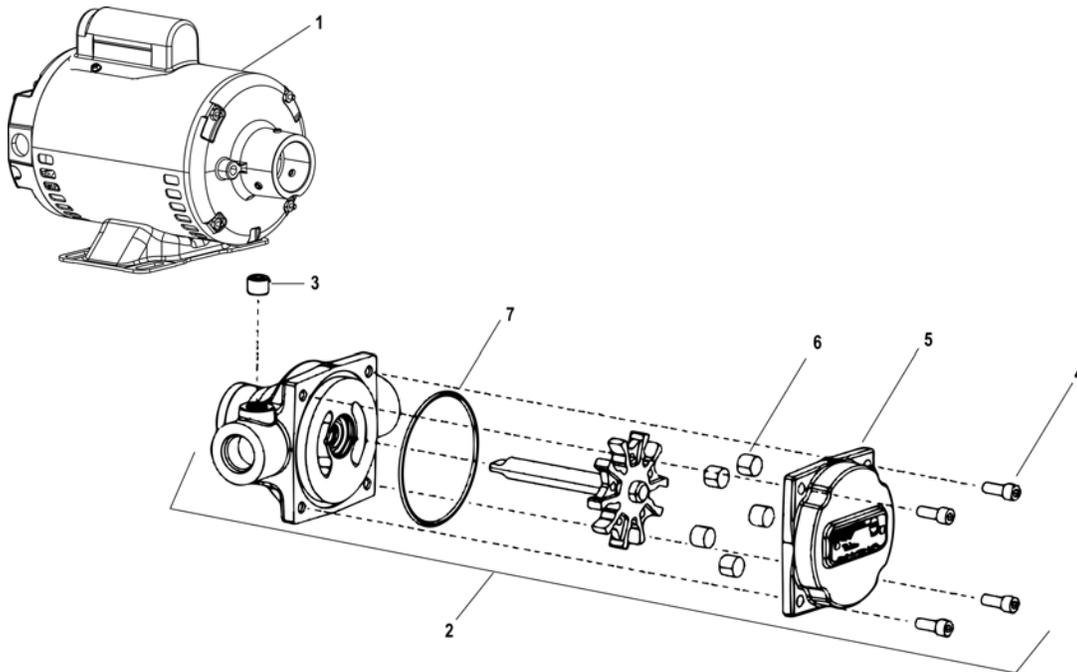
Filter Pump Motor Assembly (Units Manufactured After Sept. 2018)
